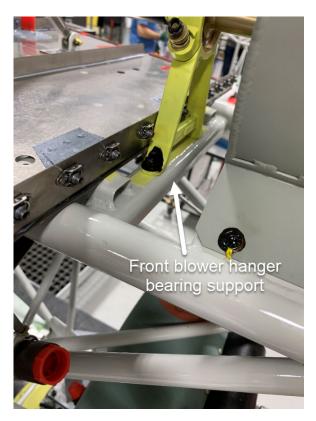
Blower Forward and Aft Hanger Bearing Attachment Brackets (2 places)
